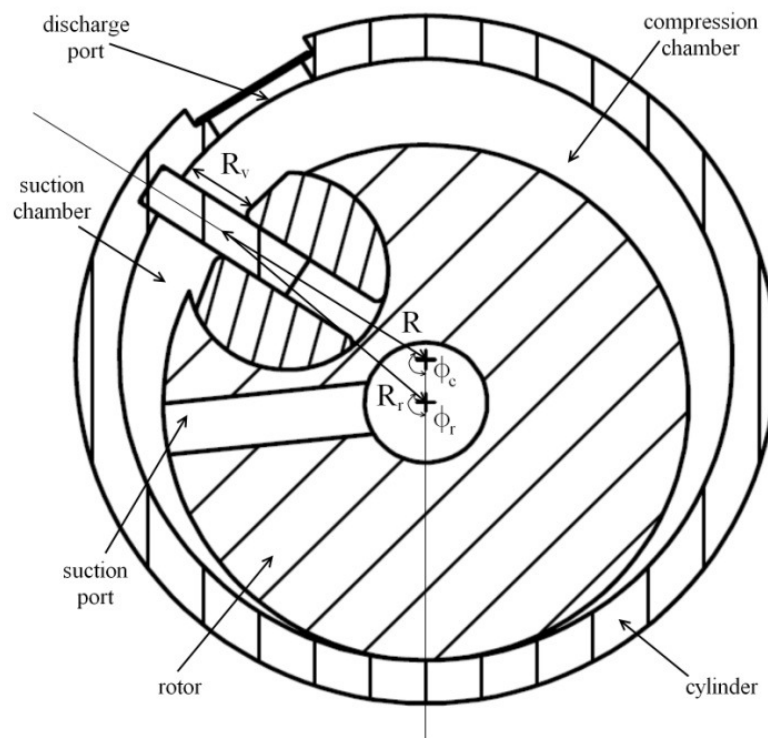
A fixed-vane revolving vane compressor with cylinder drives
